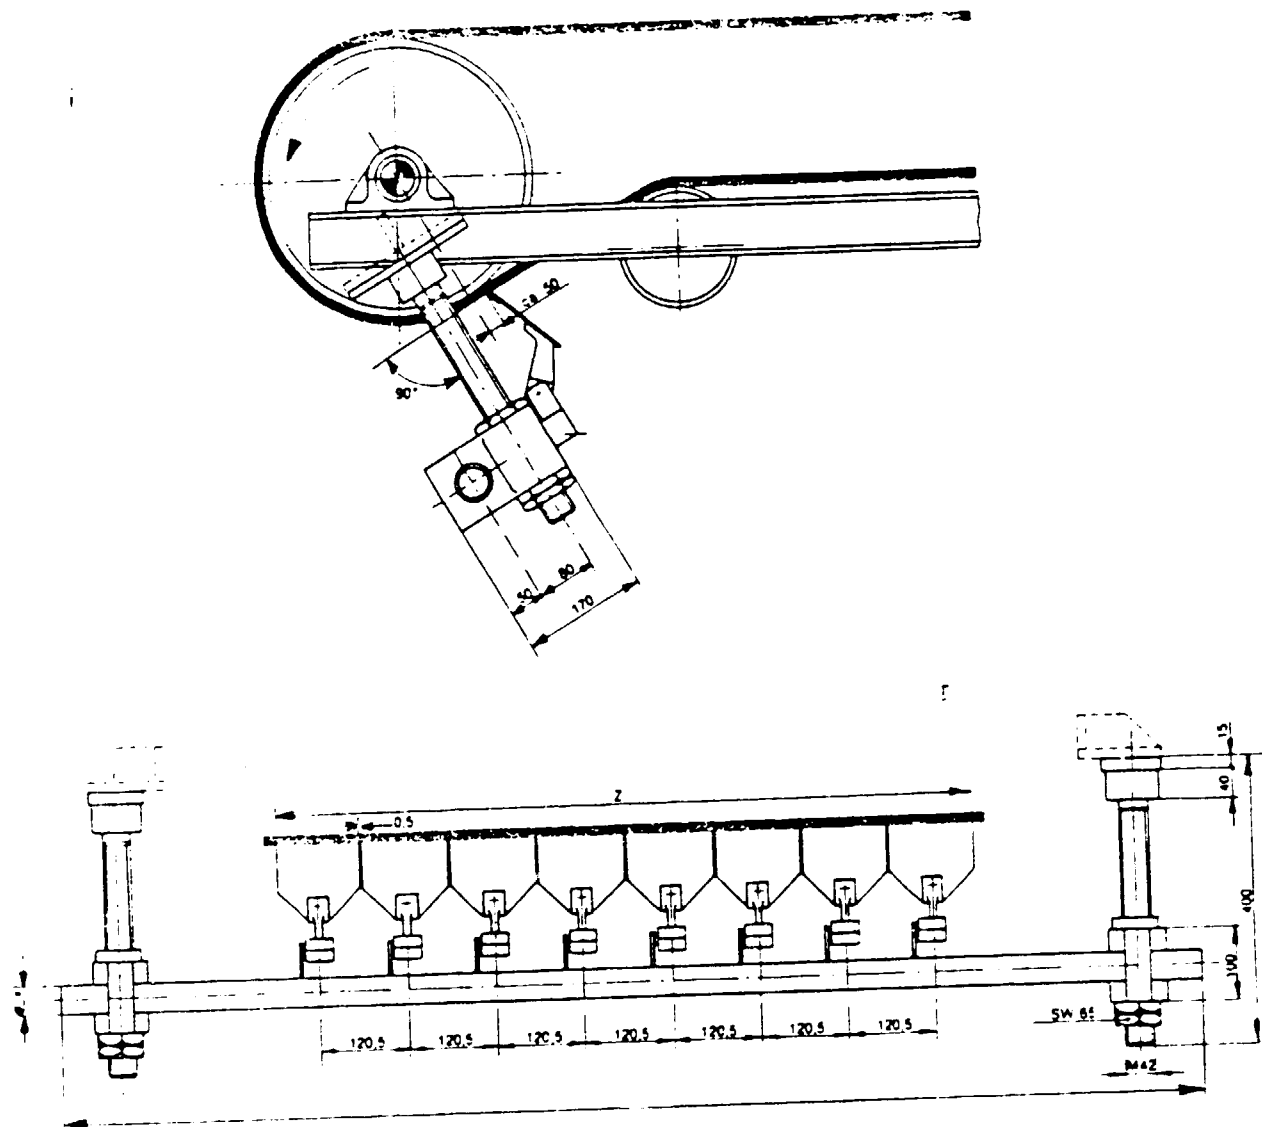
Special belt cleaner (Courtesy of Hosch, W. Germany)
